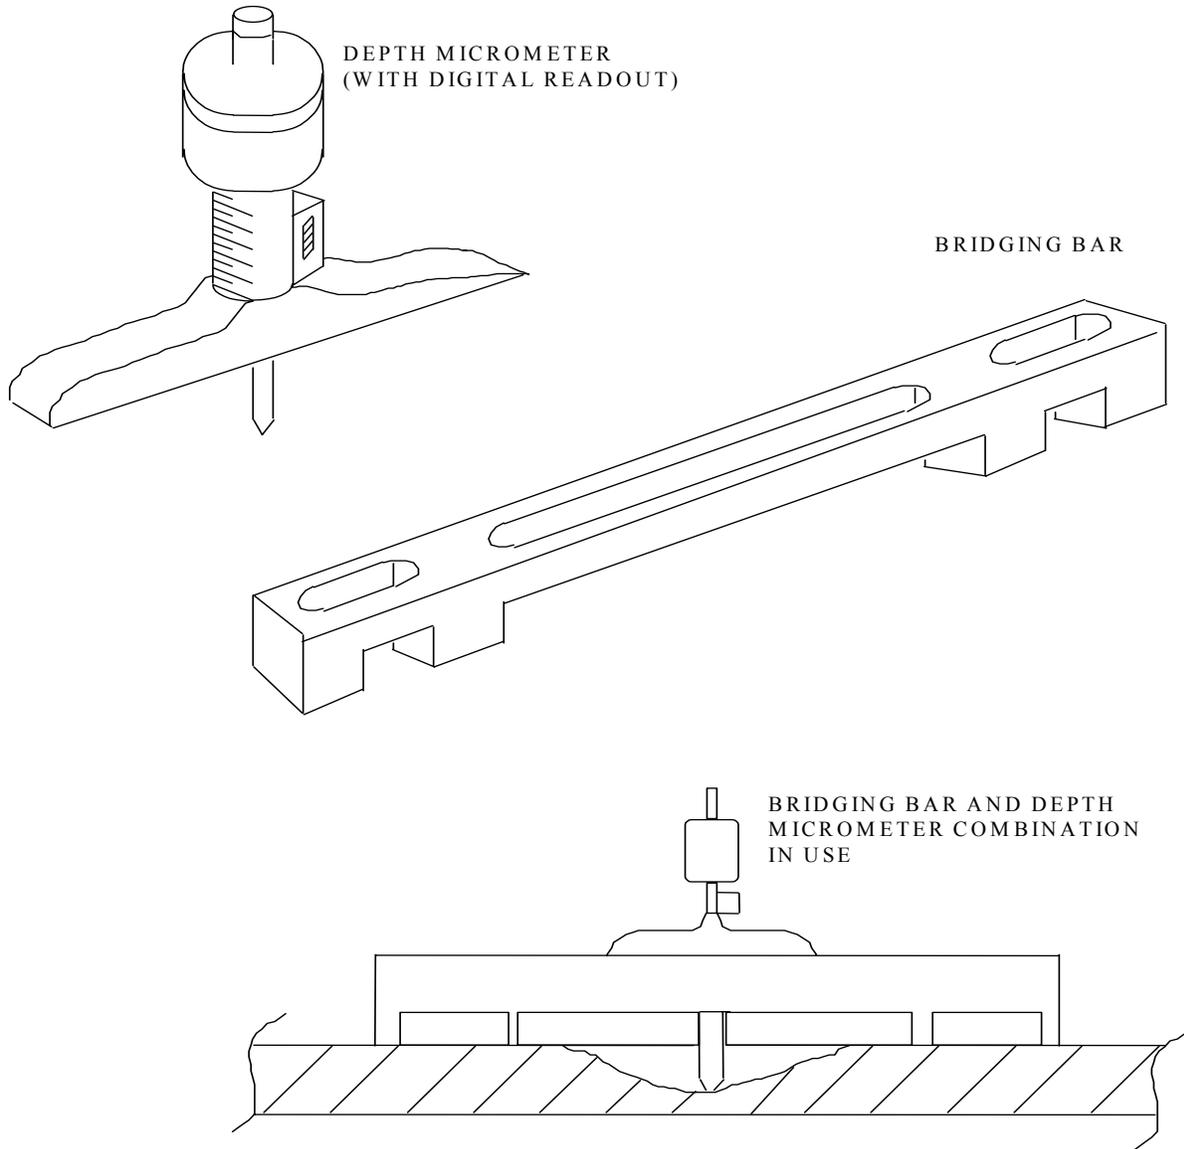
Typical Micrometer and Bridging Bar Arrangement
